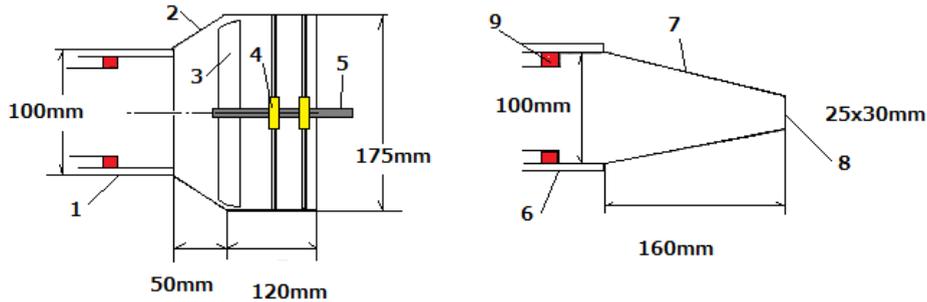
Design of turbine (a) and nozzle(b): 1. Outer casing of combustor, 2 Shroud of turbine, 3. Turbine blade, 4. bearing, 5 10mmdiameter steel shaft, 6. Outer casing of combustor, 7. converging duct wall, 8. 20mmx30mm square jet, 9. Gypsum shield(removed)
